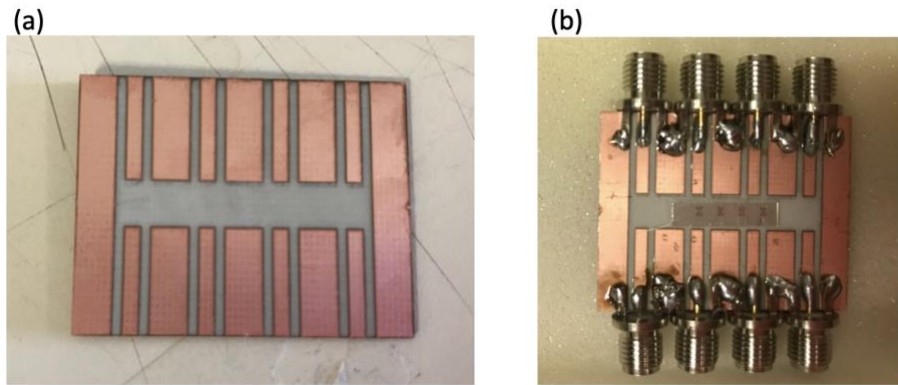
(a) PCB cut by Laser Machine and (b) device for testing.
